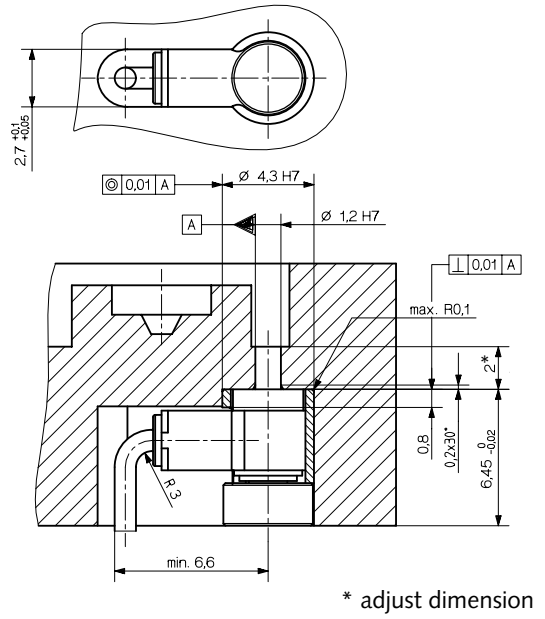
Mounting with spacer sleeve Type 6466 and thrust washer Type 6470
